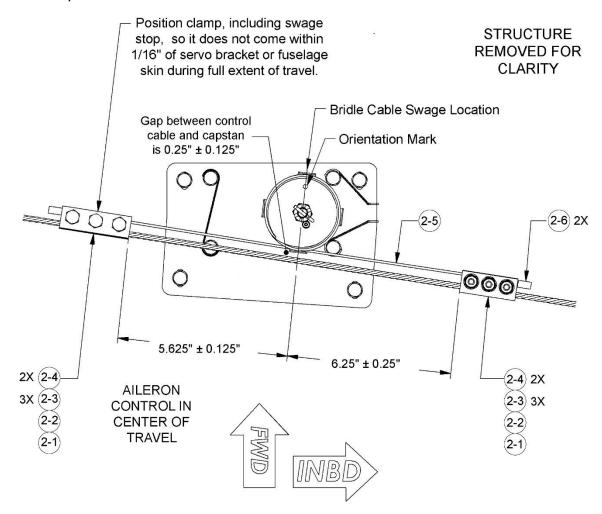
Installing Roll Servo Bridle Cable and Clamps – Outboard of Turnbuckle
